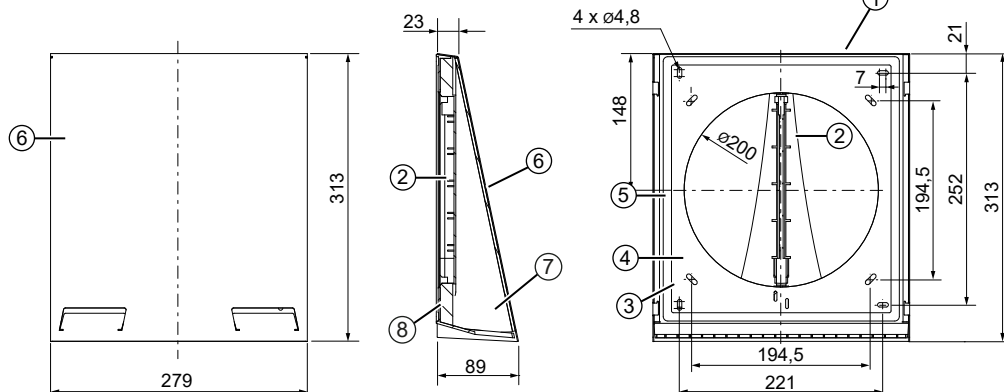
Dimensioned drawing inside panel Flair Twin+ V-233x233
